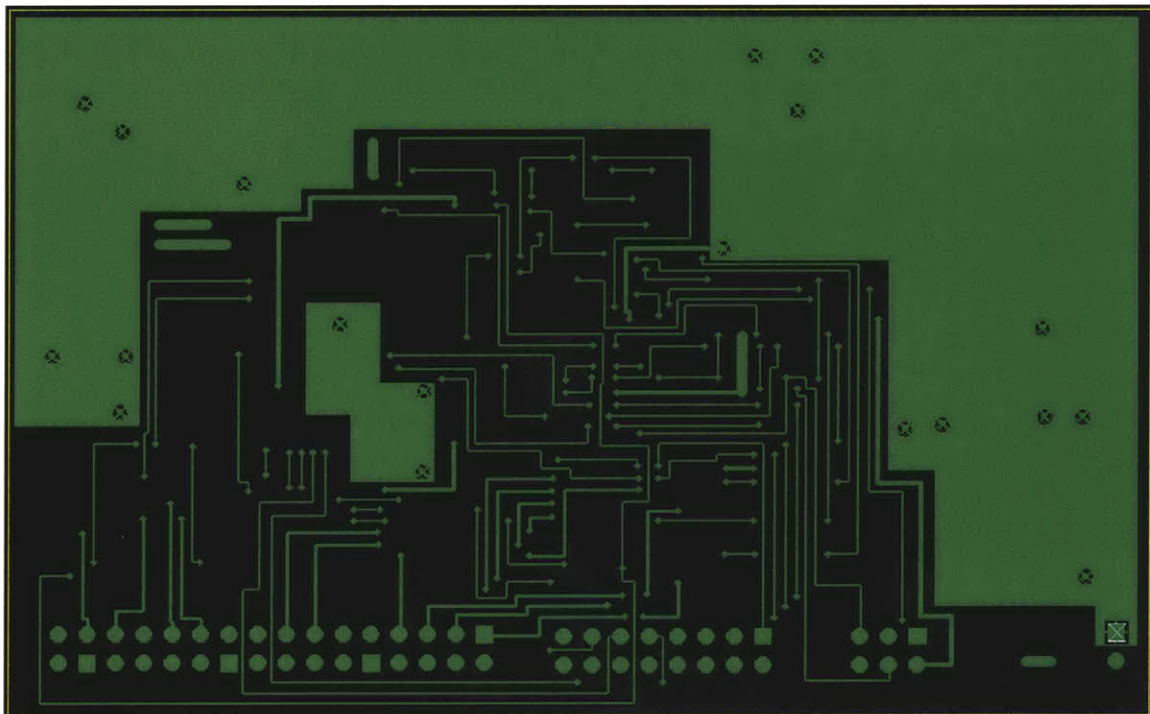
Bottom layer of PCB layout (from OrCAD Layout Plus).
